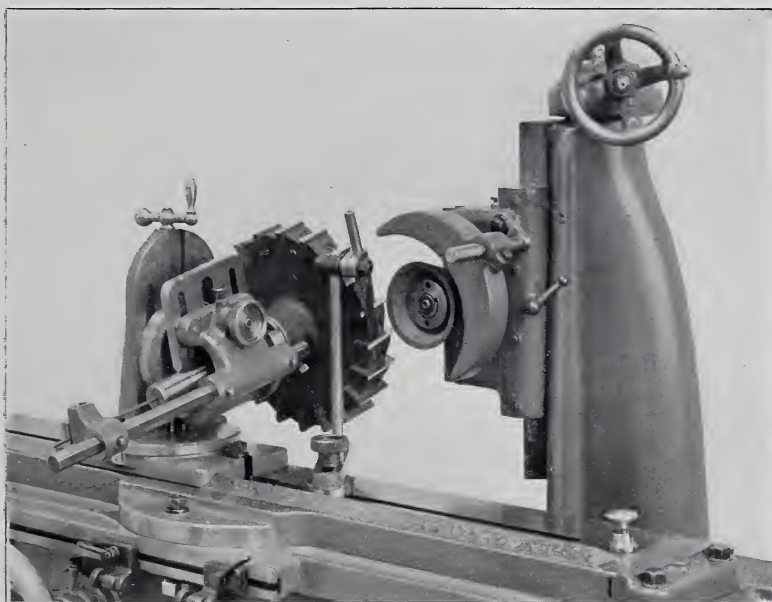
THE UNIVERSAL HEAD IN USE ON THE BROWN & SHARPE MACHINE SHOWN IN FIG. 1
